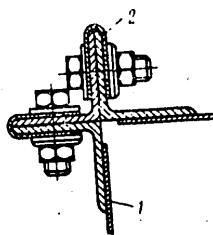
Angular connection of the panels of a collapsible chamber made of steel sheets:
